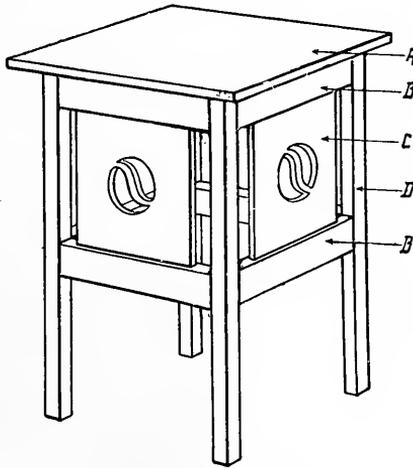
PARTS OF A PIECE OF FURNITURE.
